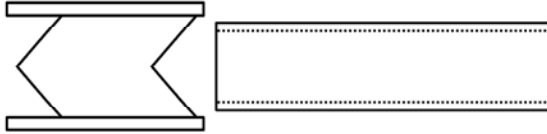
Removal of external burrs from PVC pipe (right) with deburring tool (left).
